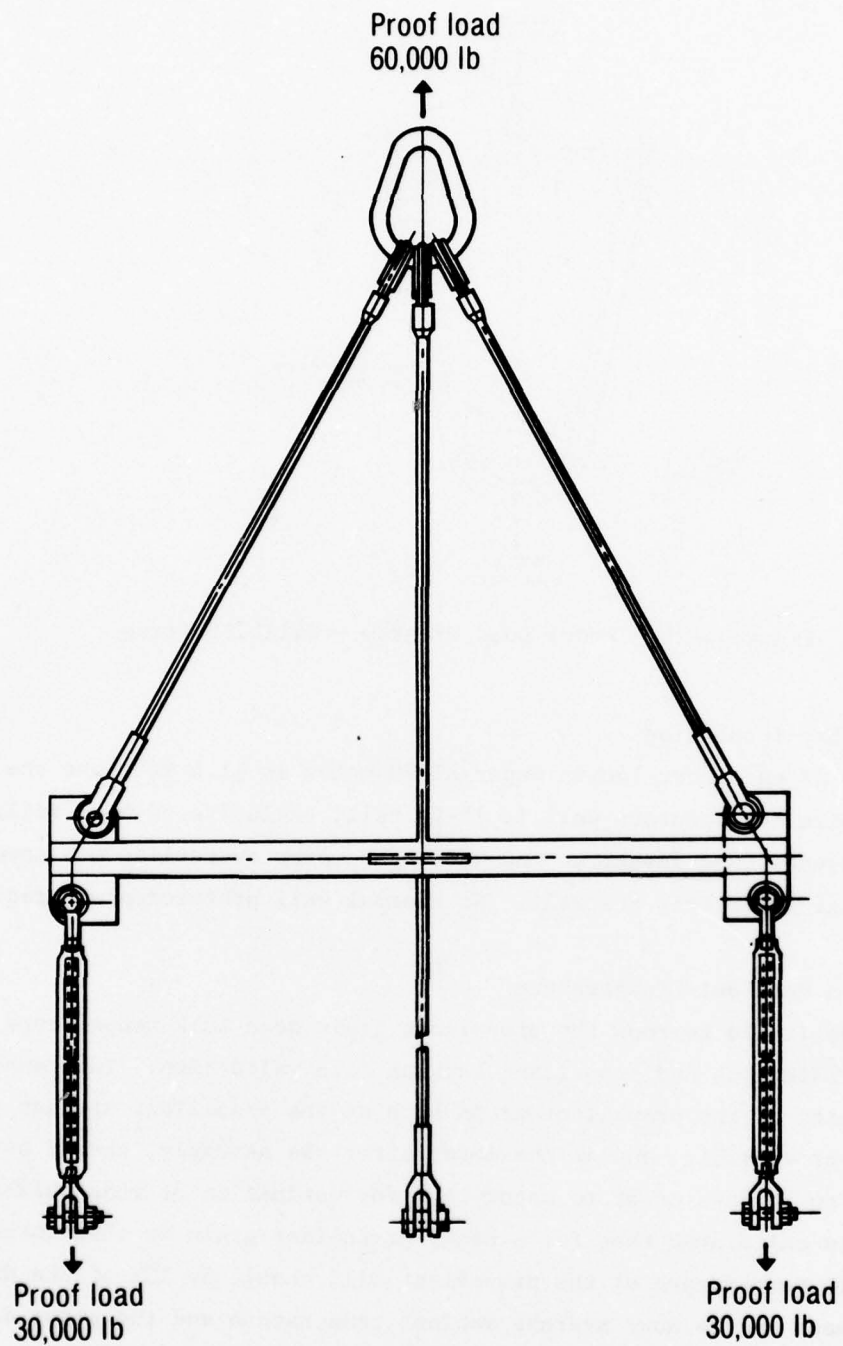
Proof Load Diagram - C10292 Sling Assembly
